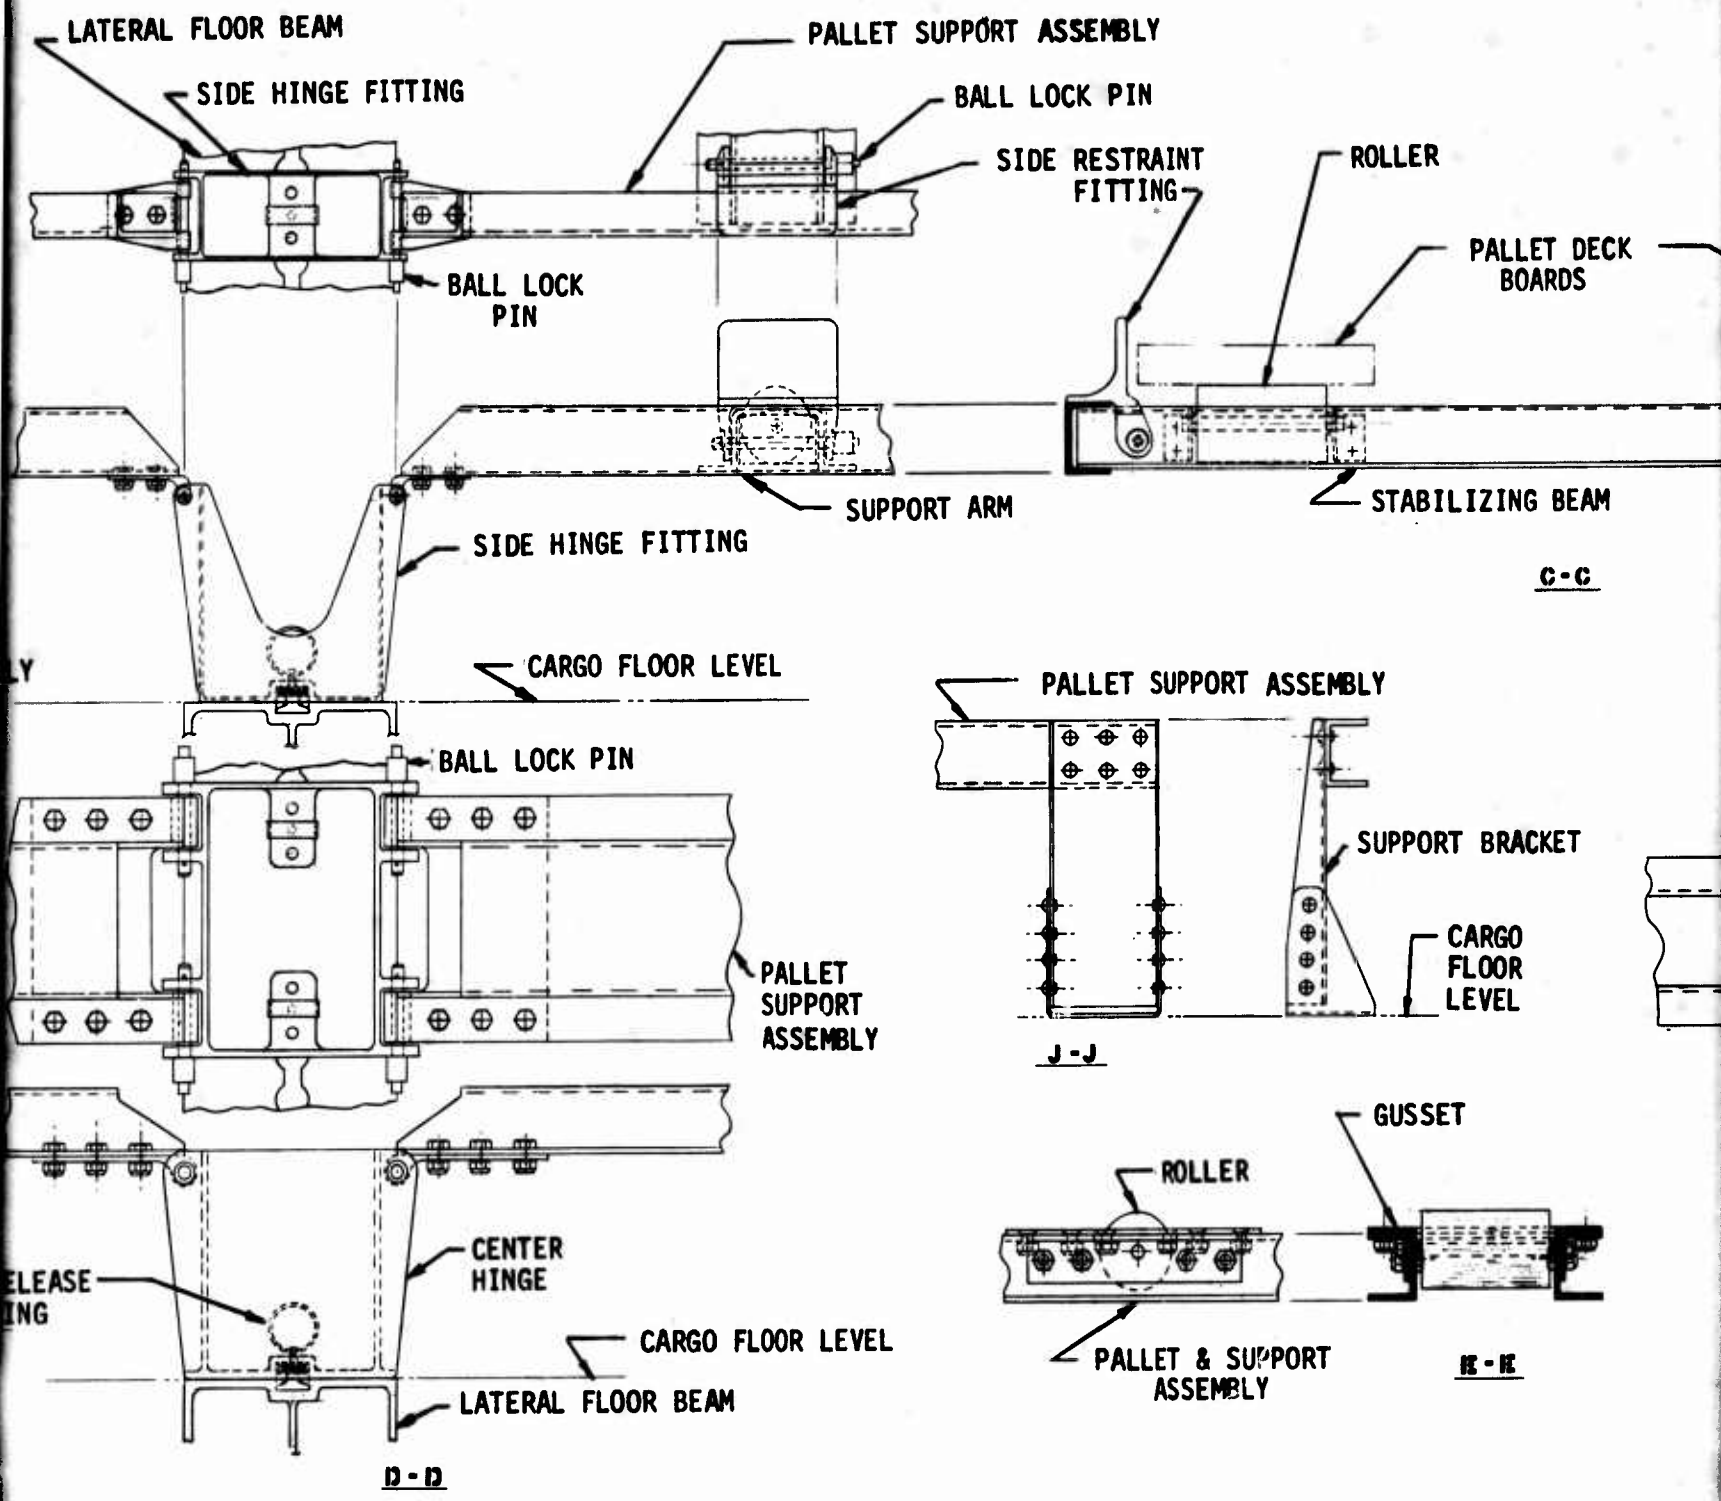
(U) Detail Design of V/M Cargo Handling System - Add-on Pallet Support Assembly.
